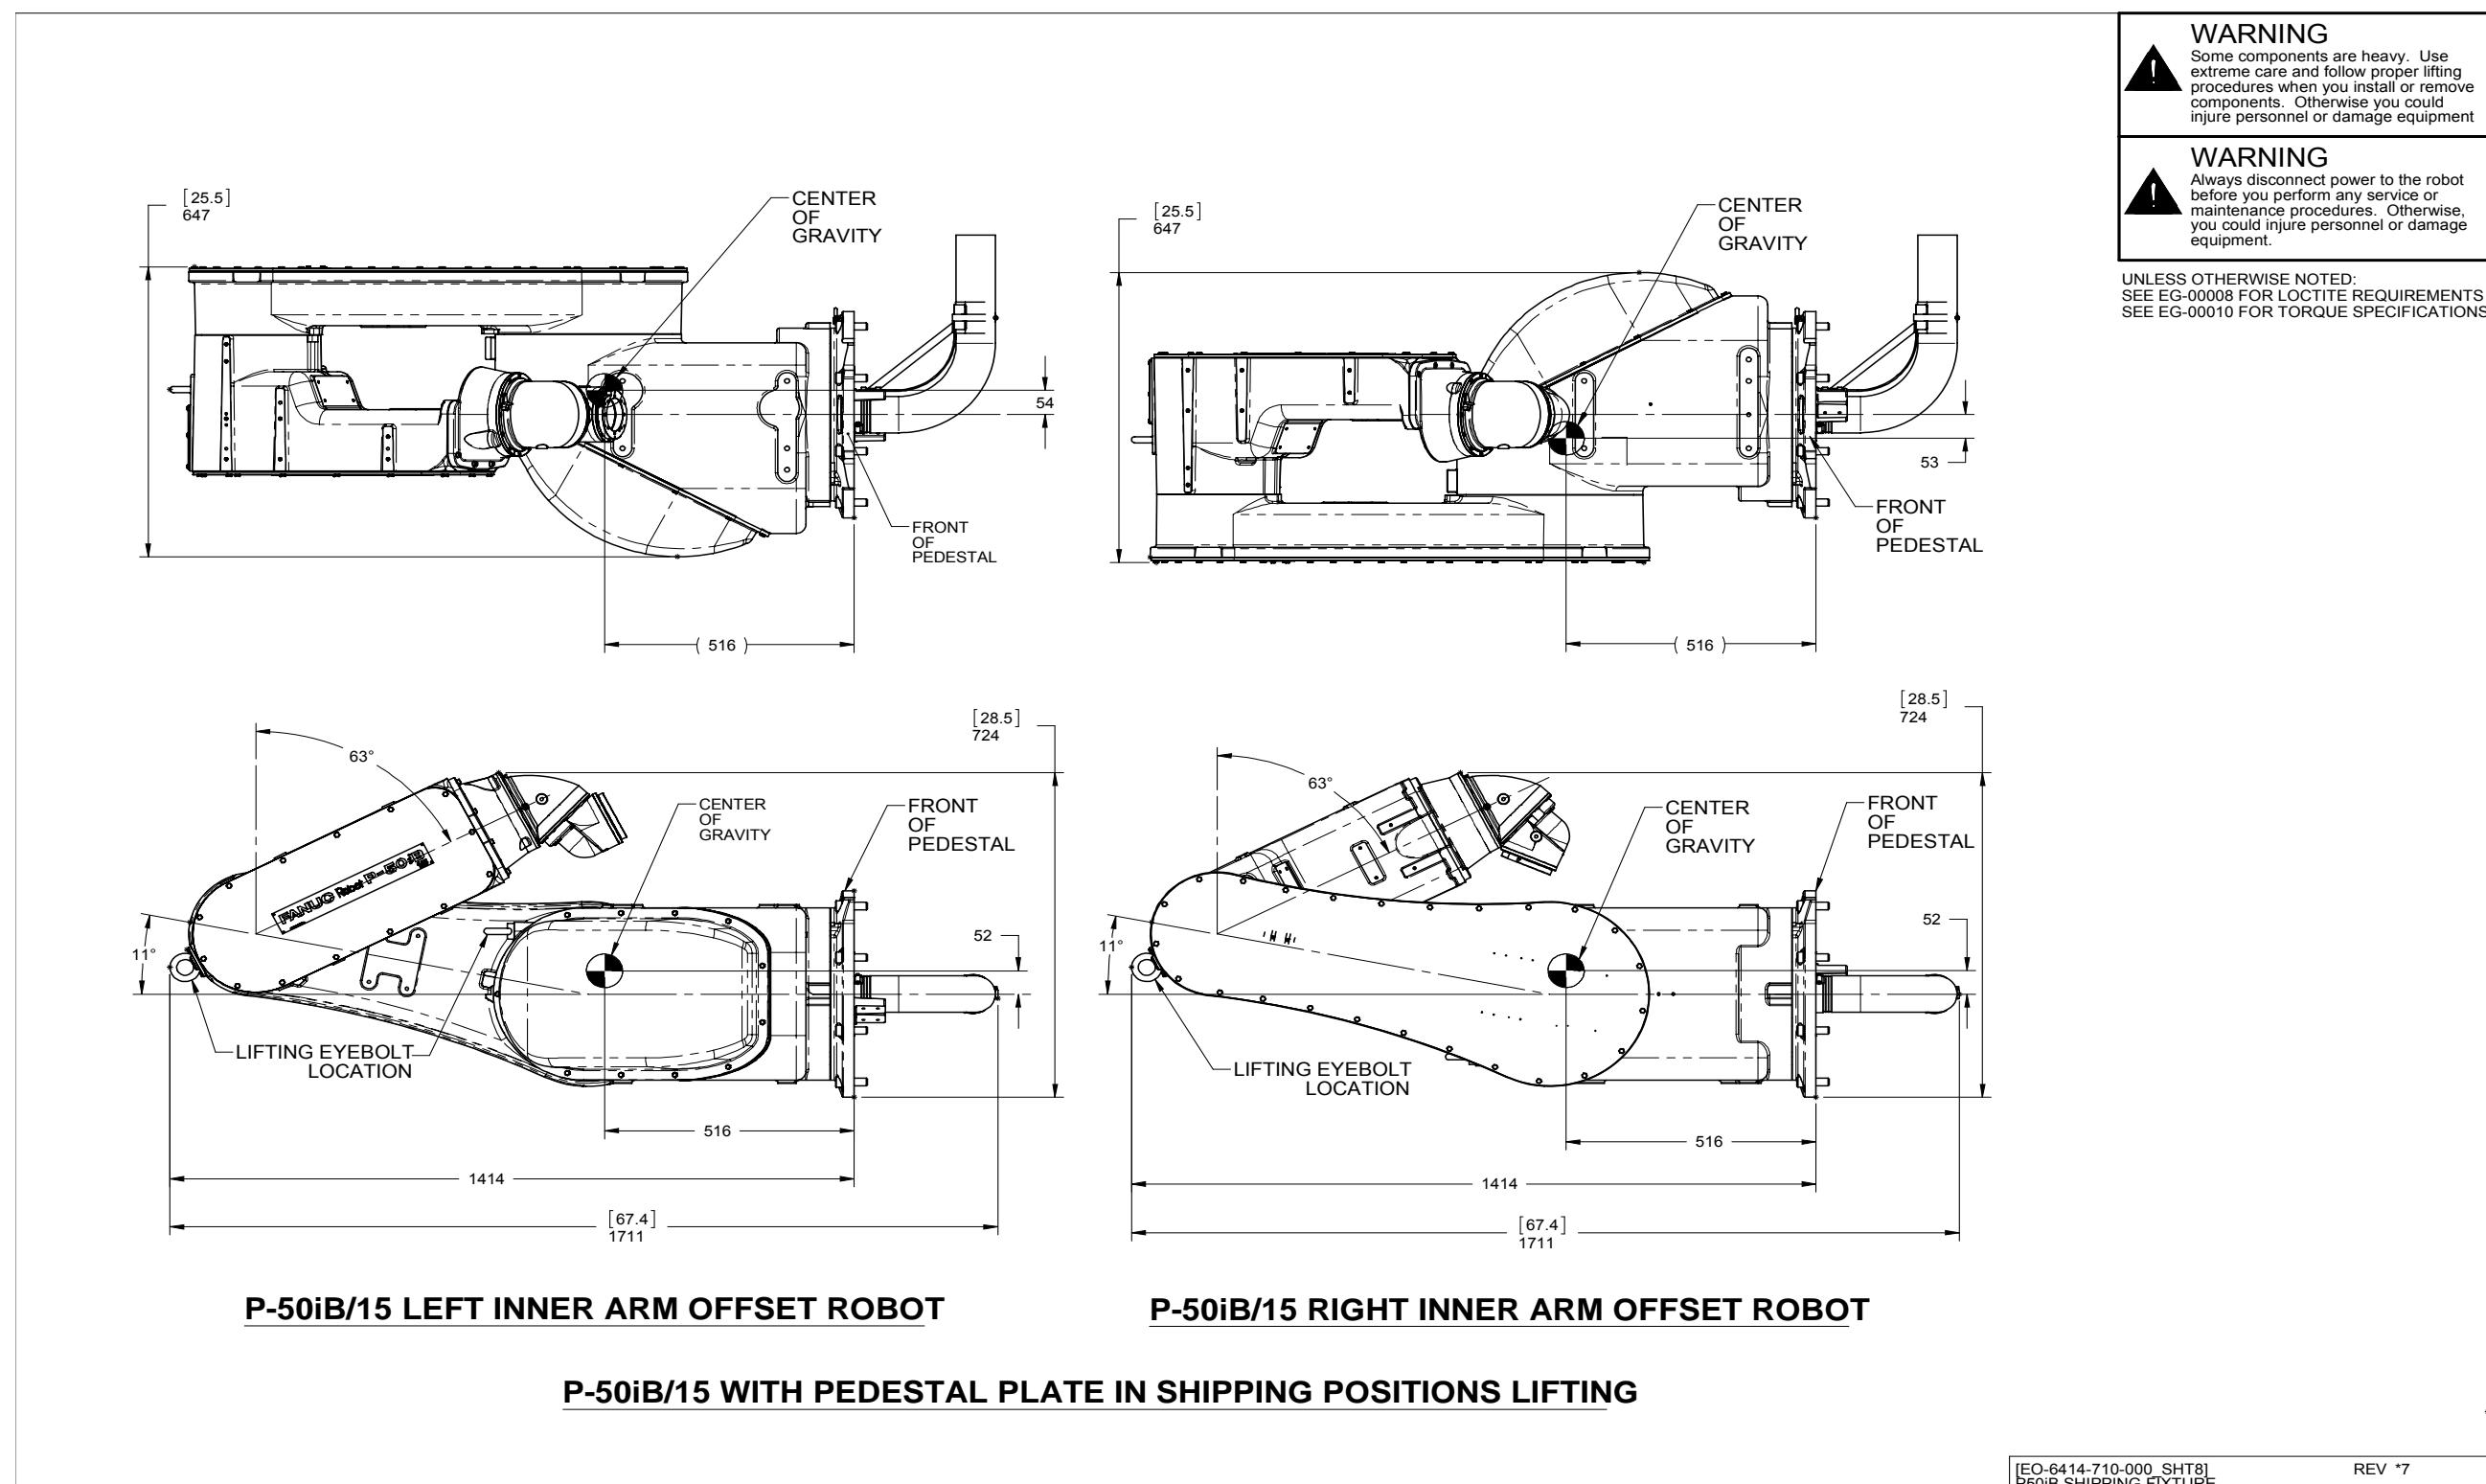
EO-6414-710-000 SHT8, P50iB SHIPPING FIXTURE
